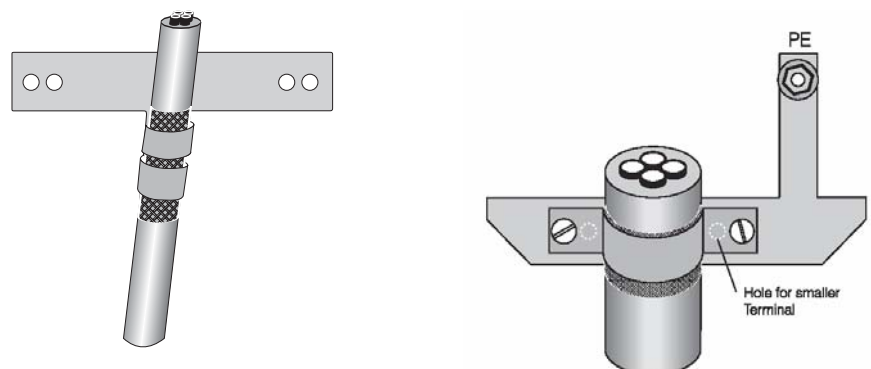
Cable screen connection to mounting parts (mains and motor cables)
